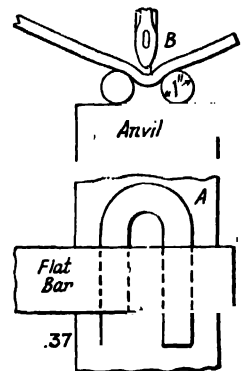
Bending a flat bar: bar is heated, placed on U-shaped tool A, and fuller is struck as at B.
